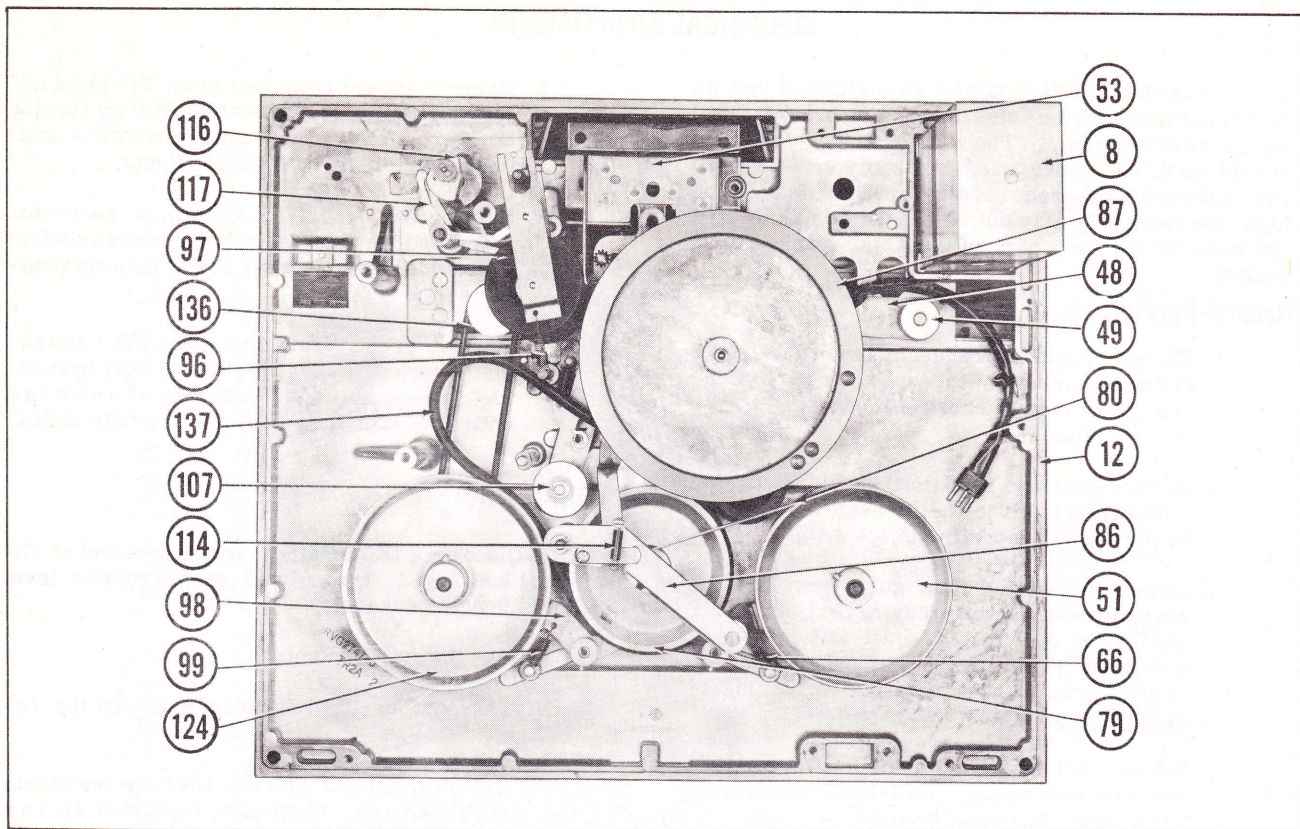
BOTTOM VIEW OF TRANSPORT MECHANISM WITH MOTOR AND AMPLIFIER REMOVED
